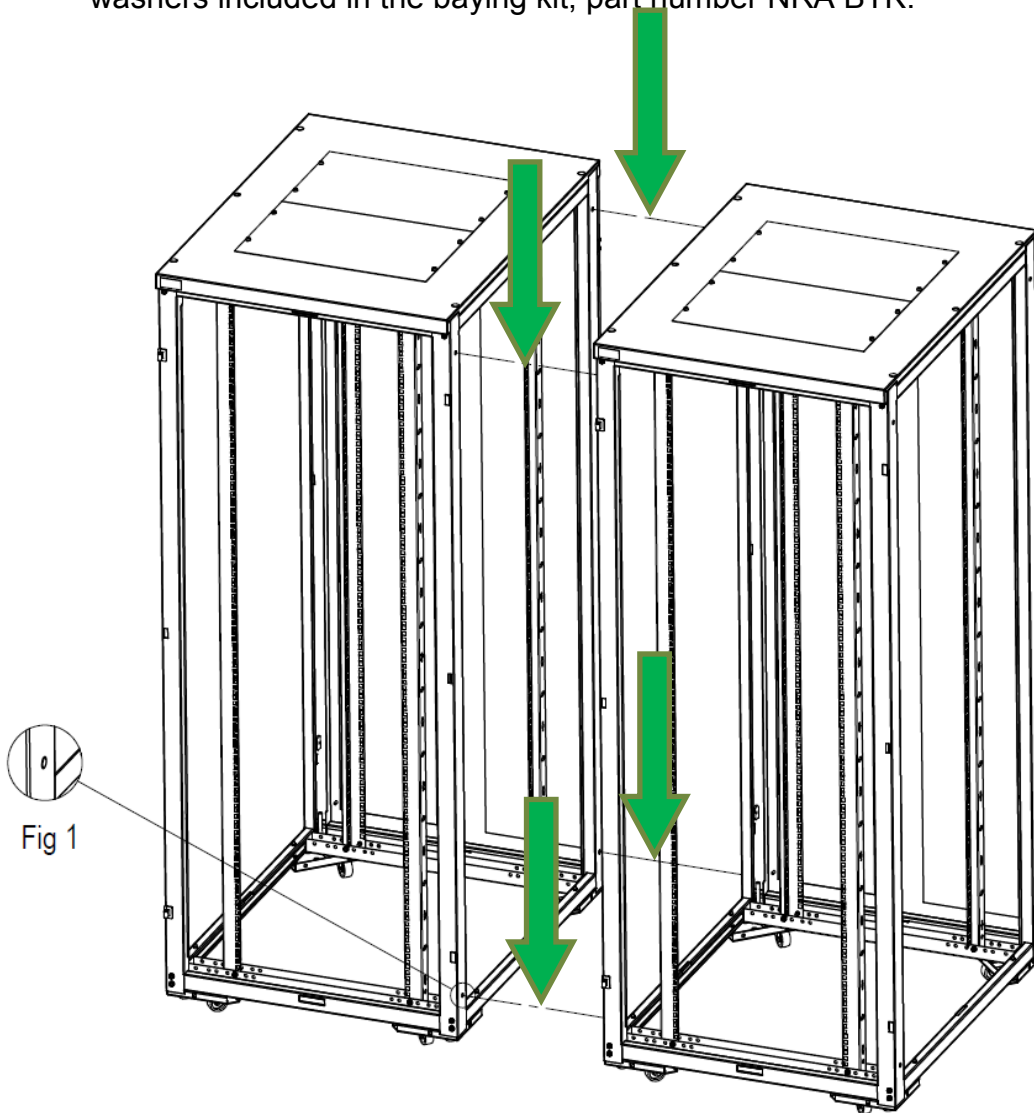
IMAGE WITH DOORS AND SIDE PANELS REMOVED
